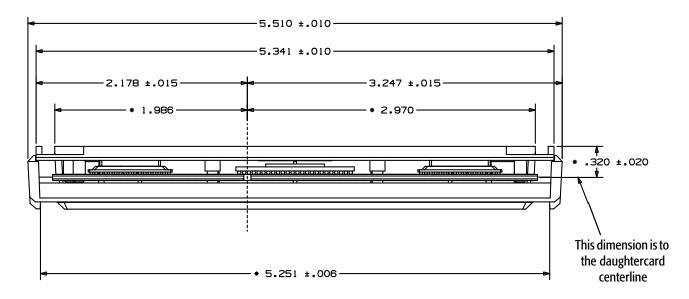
AMD Athlon™ Processor Module Dimensions-Edge View
